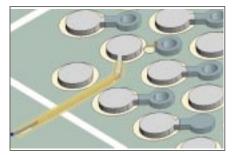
Solder a foil jumper to the tail extending from the new BGA pad.
